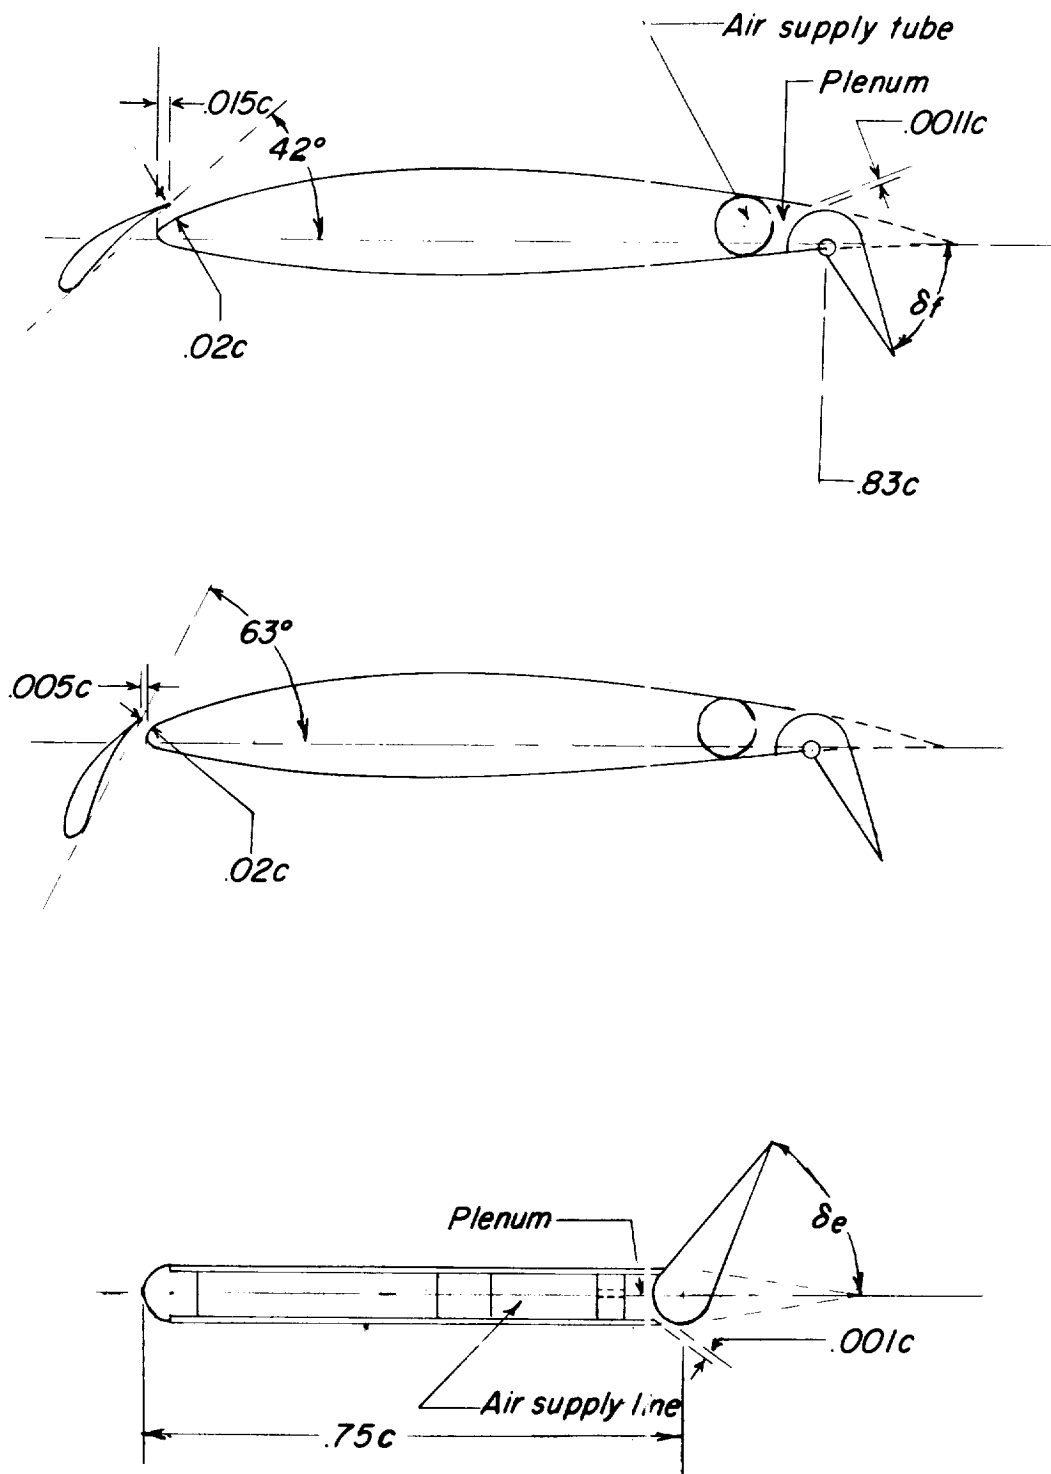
Typical sections of the wing, flap, slats, and tail.
